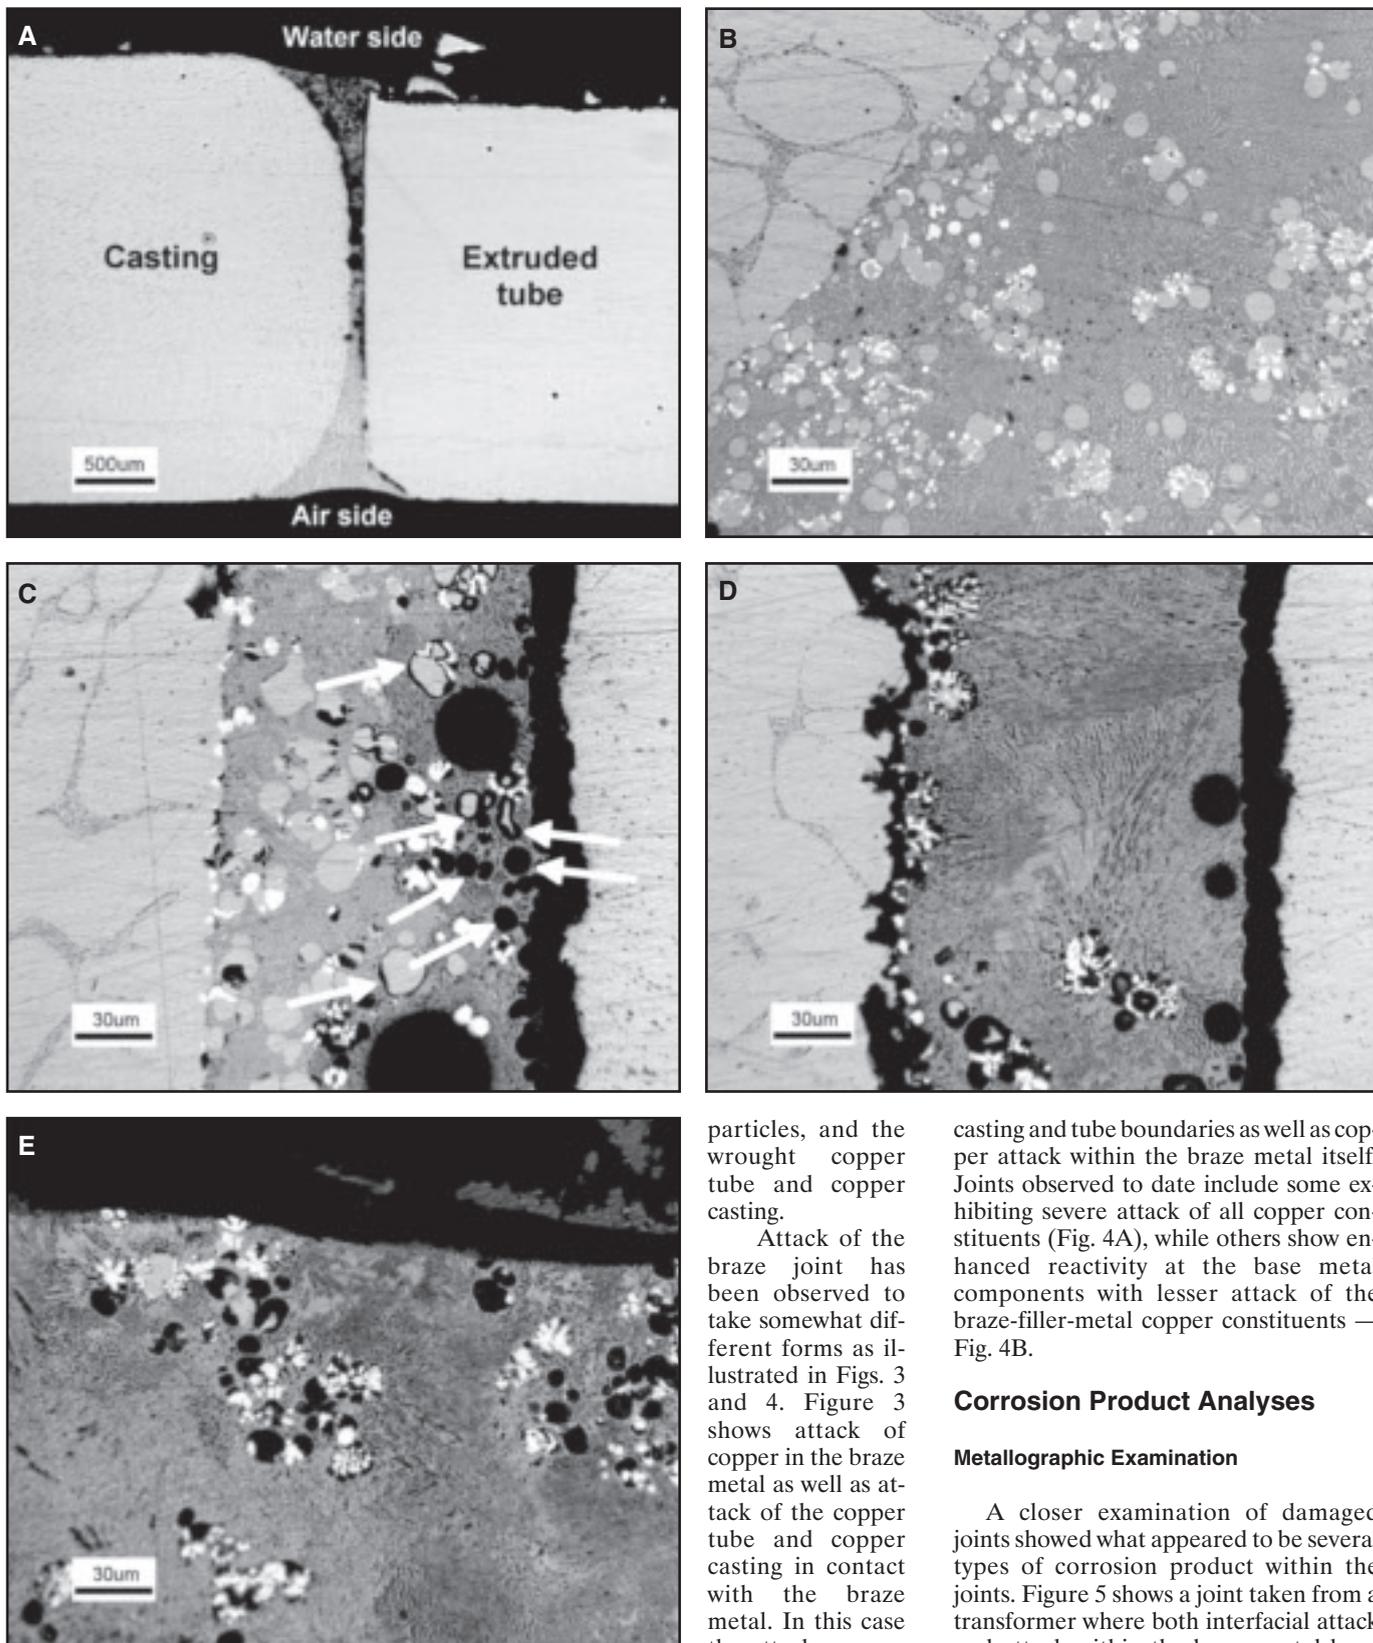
Cross-sectional views of a damaged brazed joint. A — An overview; B — a location with no damage near the air side of the joint; C-E — locations with progressively more severe damage approaching the water side of the joint.
